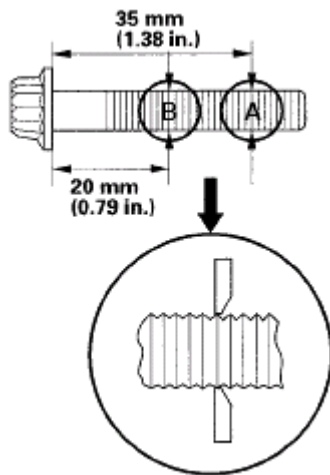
Measuring Diameter Of Connecting Rod Bolt
